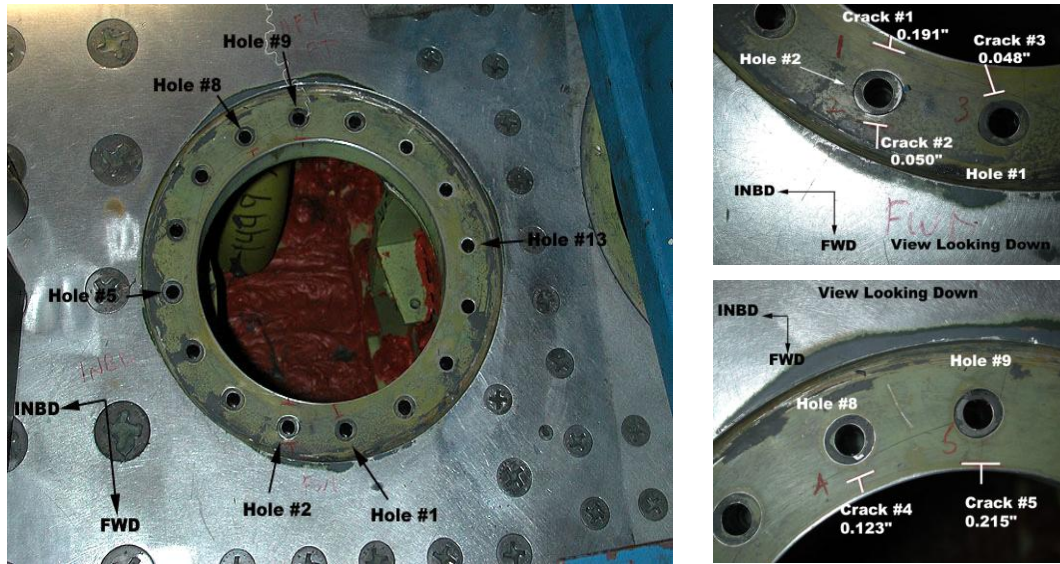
Fatigue Cracking from Davis Nut Fastener Holes at CSS 111
